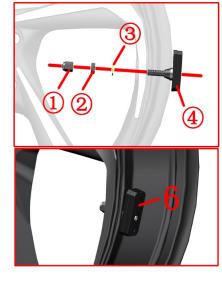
RI	EAR WHELL Rear wheel component		CHK
